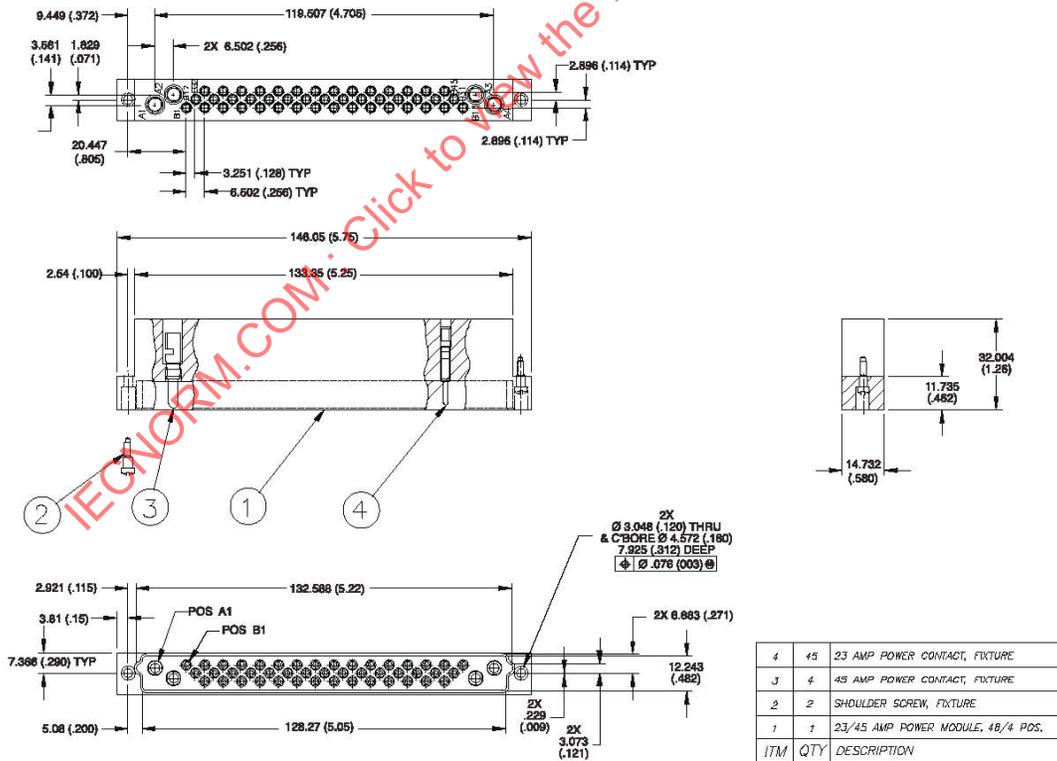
Mixed power module, 45-23 A/4-45 A position-rating, fixture housing physical layout
